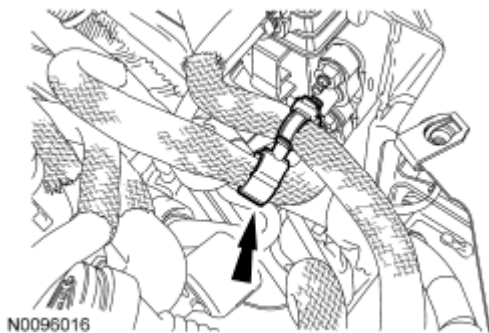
Locating Coolant Vent Hose Retaining Clip
